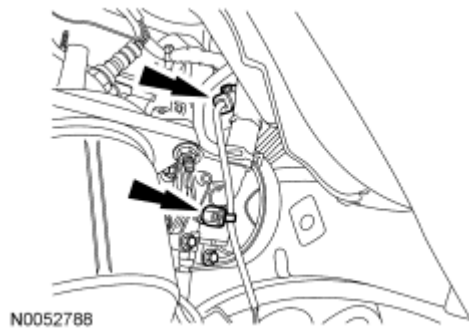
Identifying RH HO2S Electrical Connector
